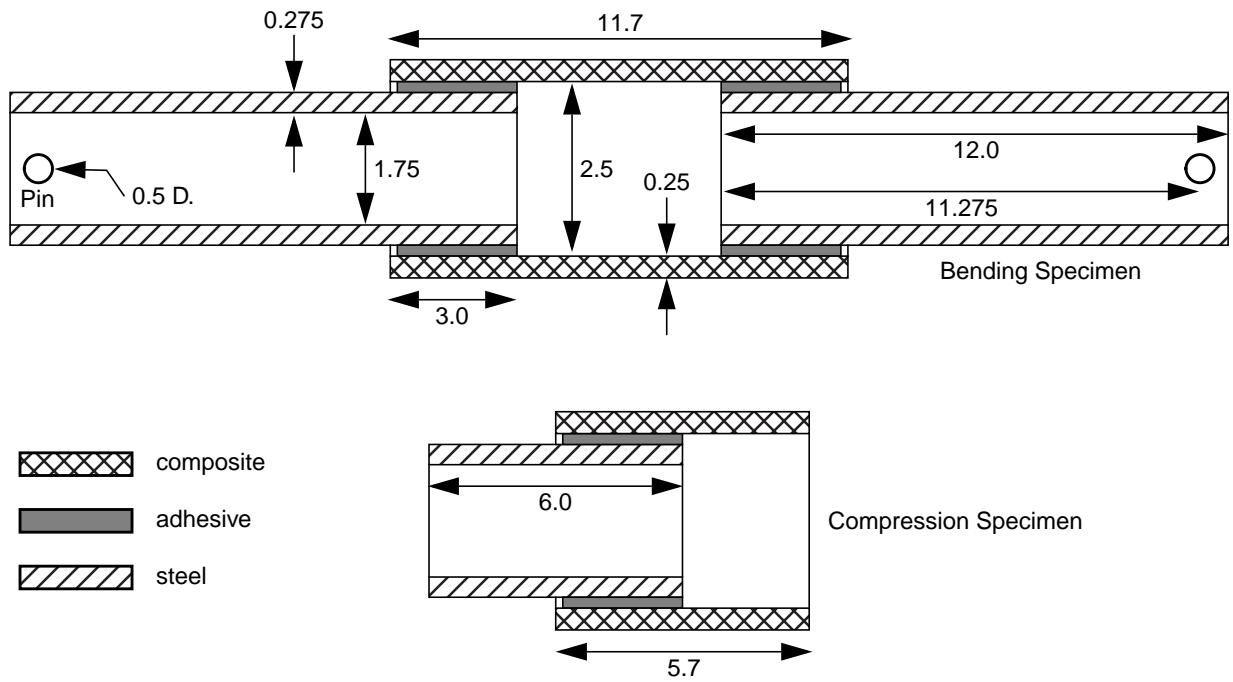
Schematic of Joint Geometries (Cut-away View, Dimensions in Inches)
